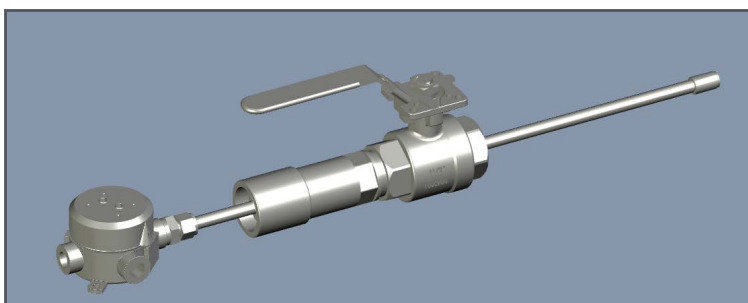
Example of a T5MAX Transducer in an FLI Assembly that Mounts to 1.5" Nozzles
